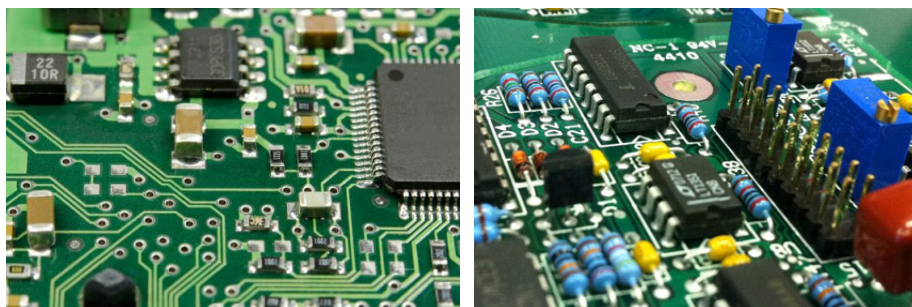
Images of Surface Mount (Left) and Through-hole (Right) printed circuit boards.
